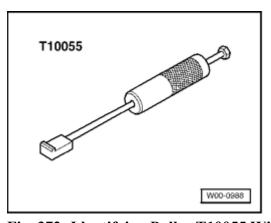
Identifying Puller T10055 With Adapter T10055/3 Courtesy of VOLKSWAGEN UNITED STATES, INC.
